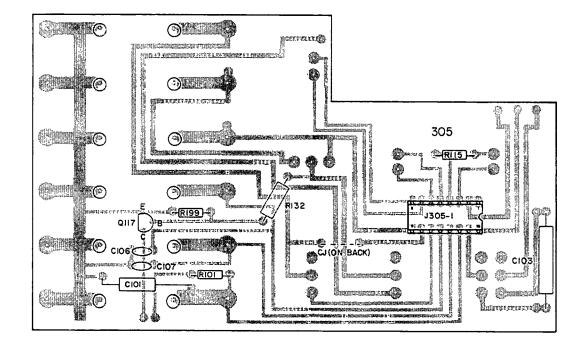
P.C. BOARD ASSEMBLY, BOARD 305, DRAWING
